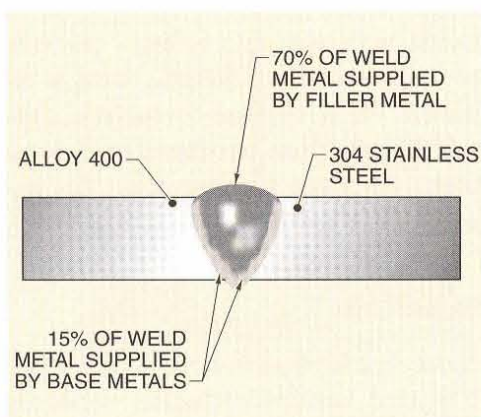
When welding dissimilar metals, the chemical composition of the weld is made up of metal supplied by both the filler metal and the base metal.
